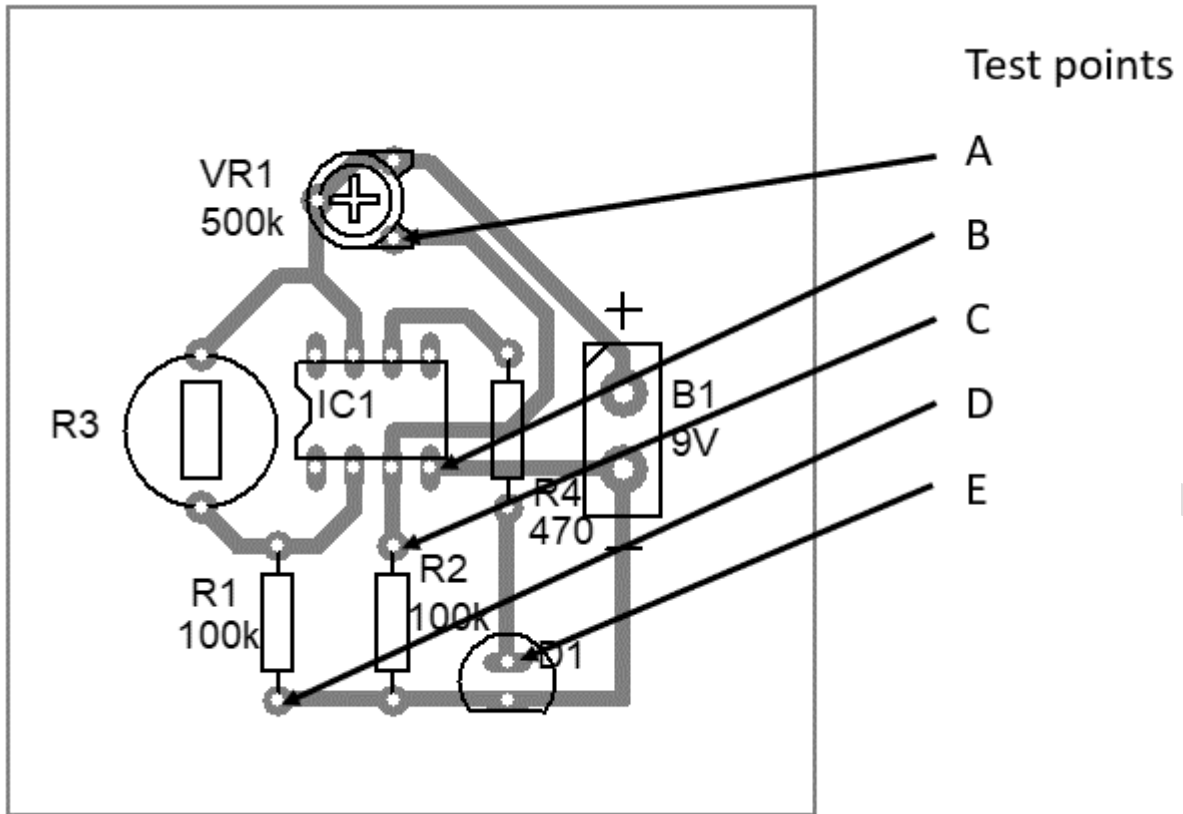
Diagram of the PCB design, highlighting test points A – E.
